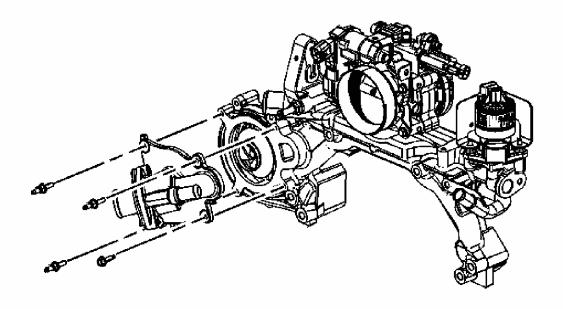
View Of Water Pump Cover, Bolt & Studs Courtesy of GENERAL MOTORS CORP.
